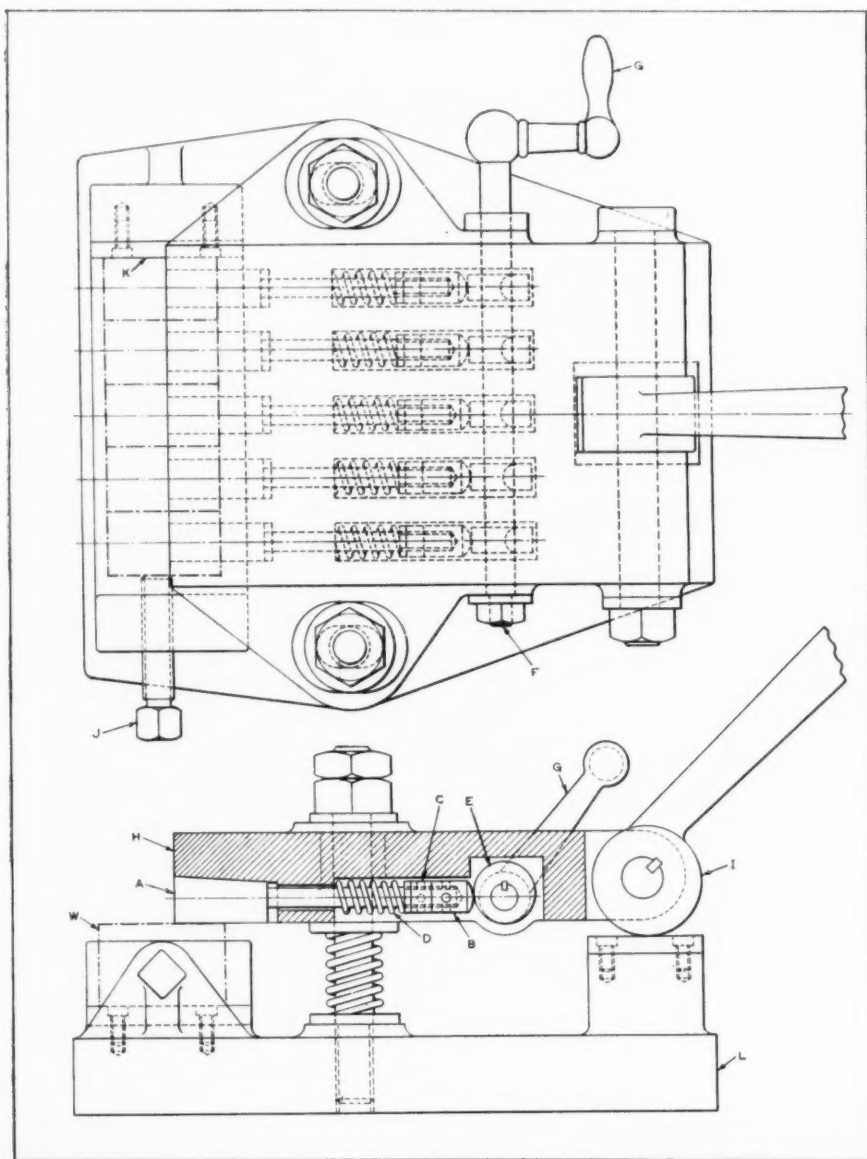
Milling Fixture with Equalizing Clamping Device Designed to Hold Five Pieces Securely, Regardless of Variations in Height
